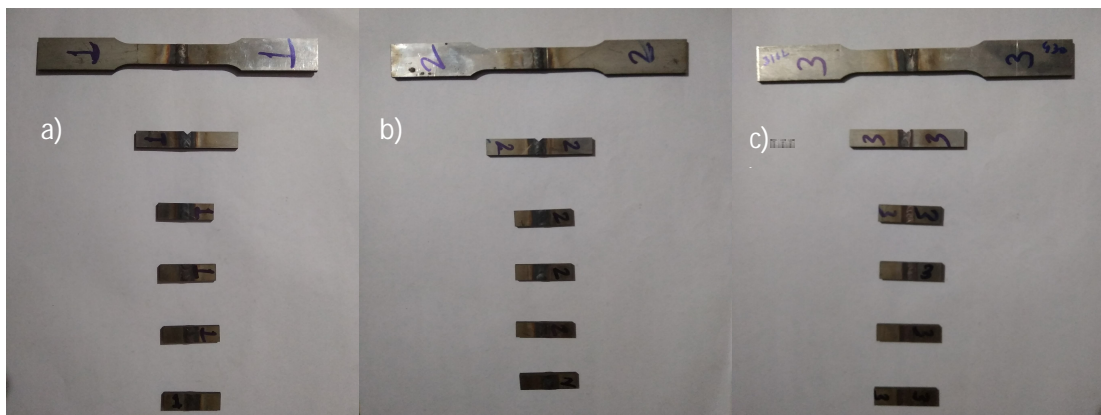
Test specimen welded with a) ER316L b) ER 309L and c) Without Filler weld
